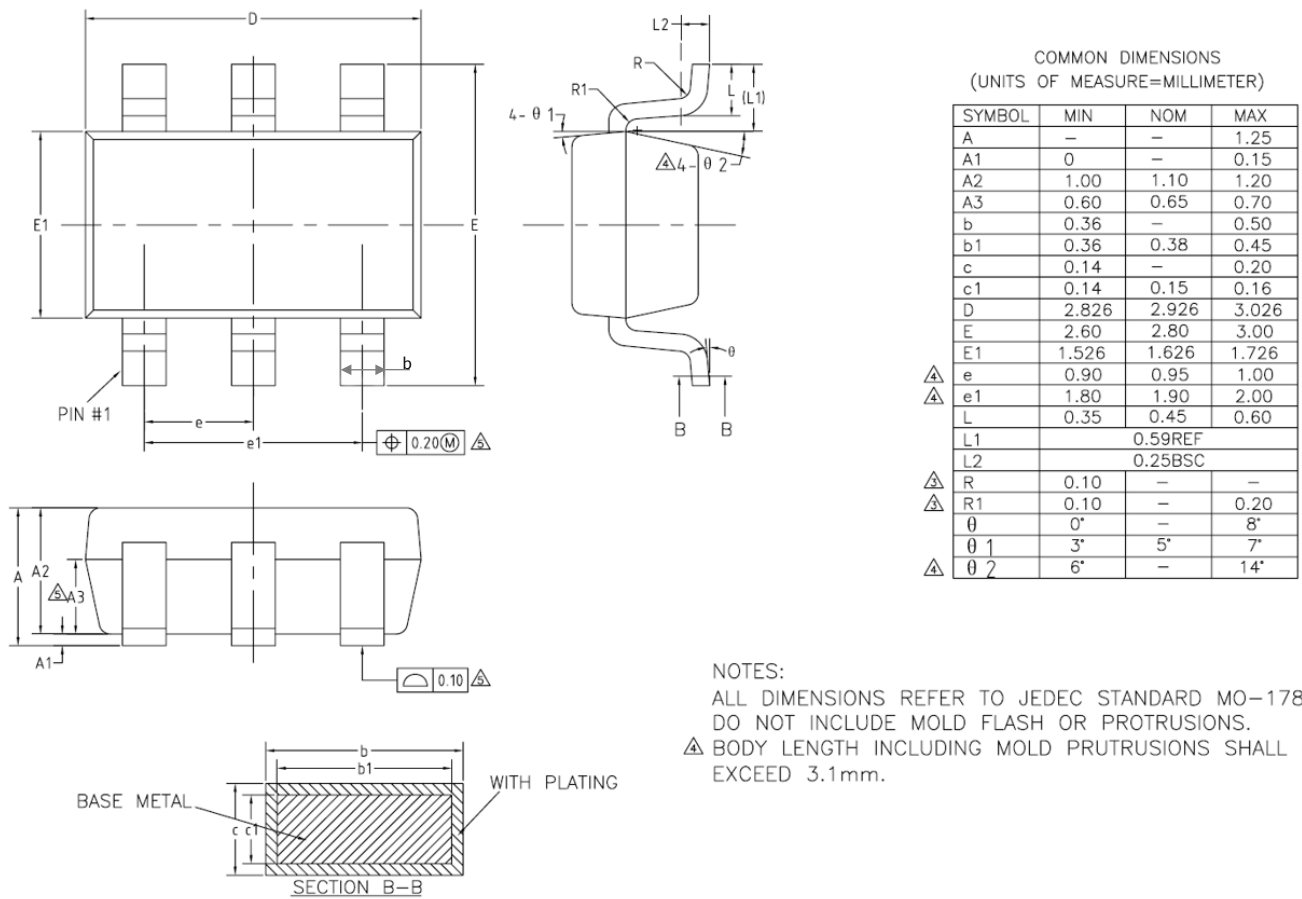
SOT23-6 Package Shape and Dimension in millimeters
